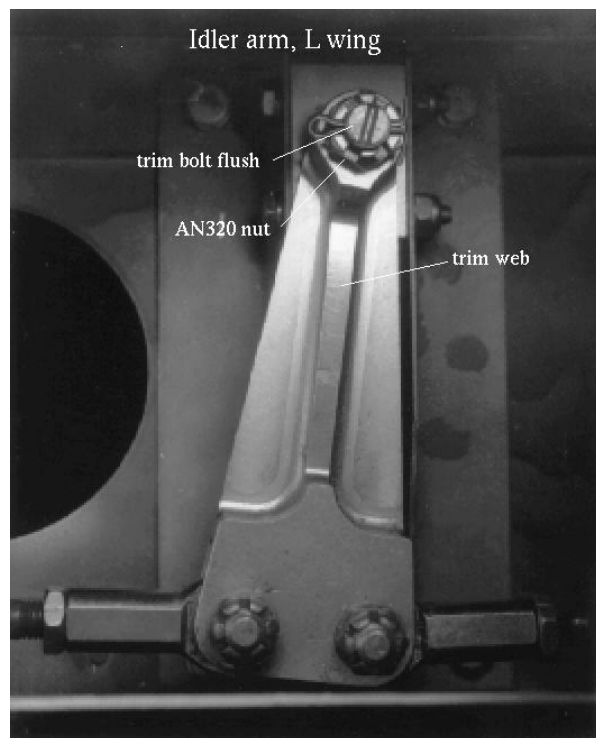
Aileron idler installed on the rear wing spar. Trim the pivot bolt back as far as possible and use a shear castle nut to secure the arm.
